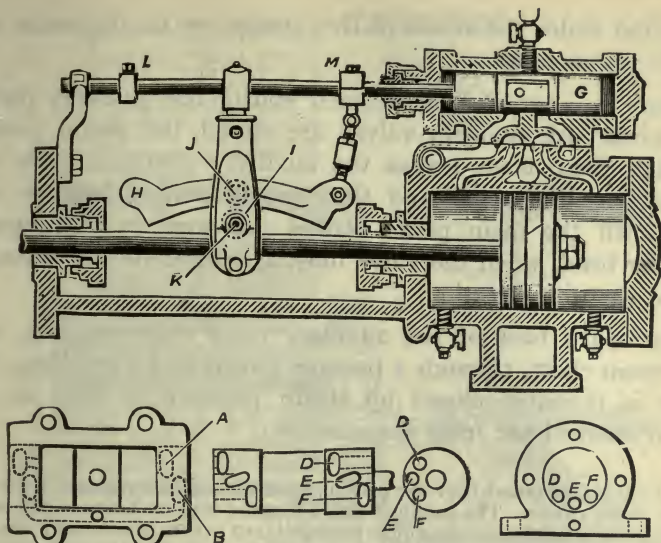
Valve gear of the Cameron pump; an example of the *separate auxiliary valve* class. *Its construction* and operation is explained in detail in the accompanying text. No valve setting is necessary, it being only necessary to keep the valves I, I, tight by occasional grinding. *In operation*, the piston as it nears the end of each stroke strikes the stem and lifts the valve off its seat; this allows the exhaust steam behind the piston valve to escape. The live steam pushes the piston towards the exhausted end carrying the main slide valve along with it.
